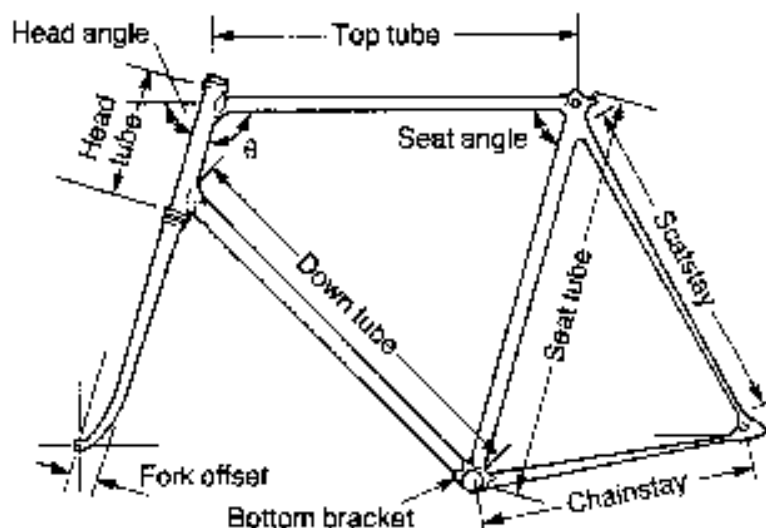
Typical diamond frame bicycle showing the main parts (Easterling K.E.)
